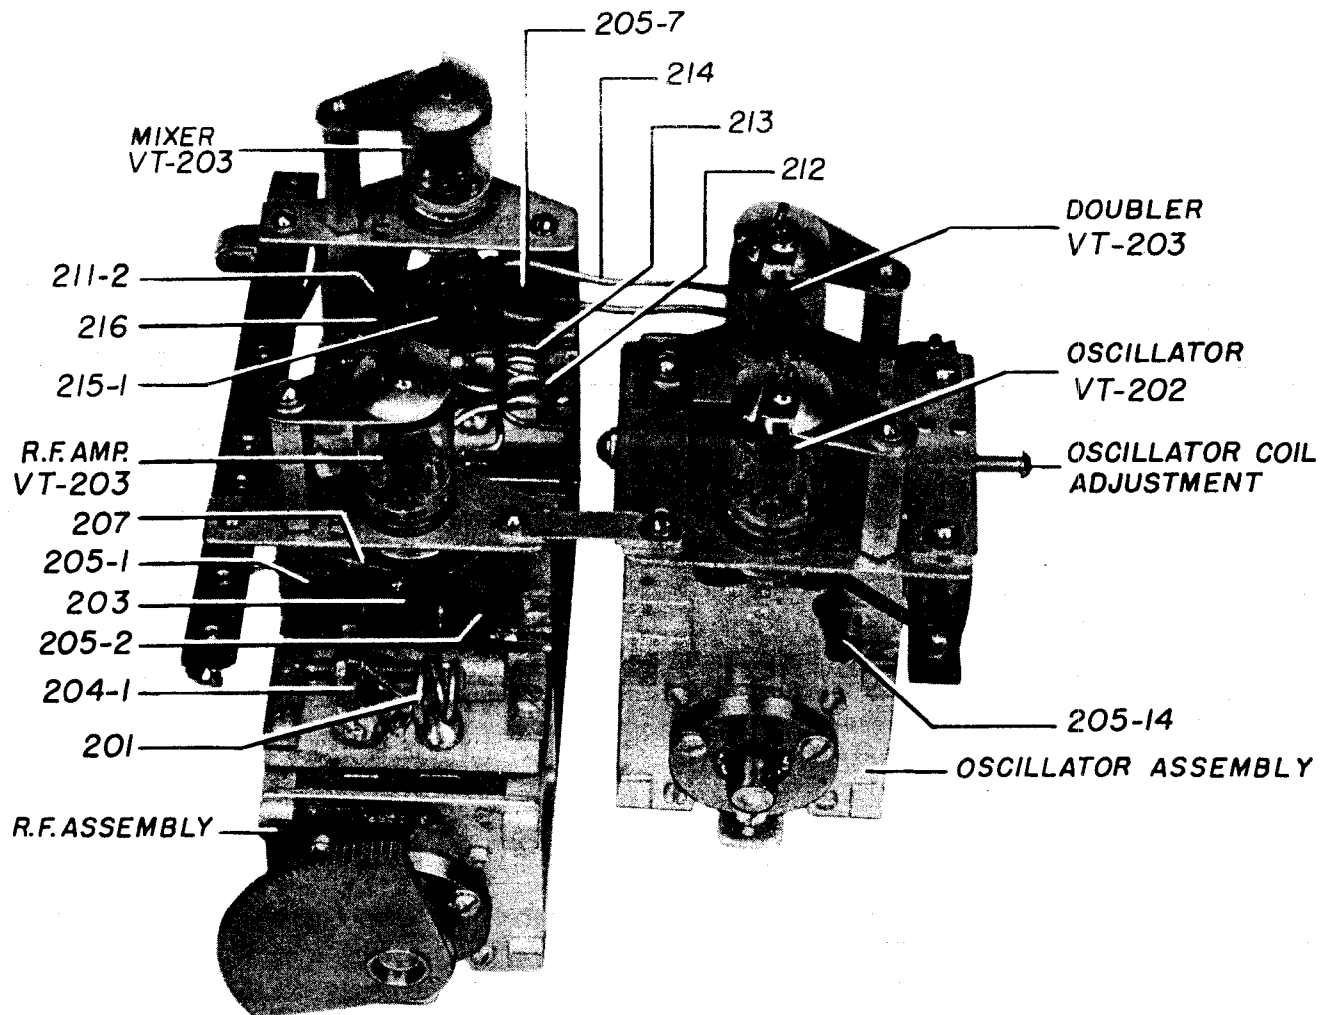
Radio Receiver BC-639-A, Top Front Oblique, R. F. and Oscillator Assembly
